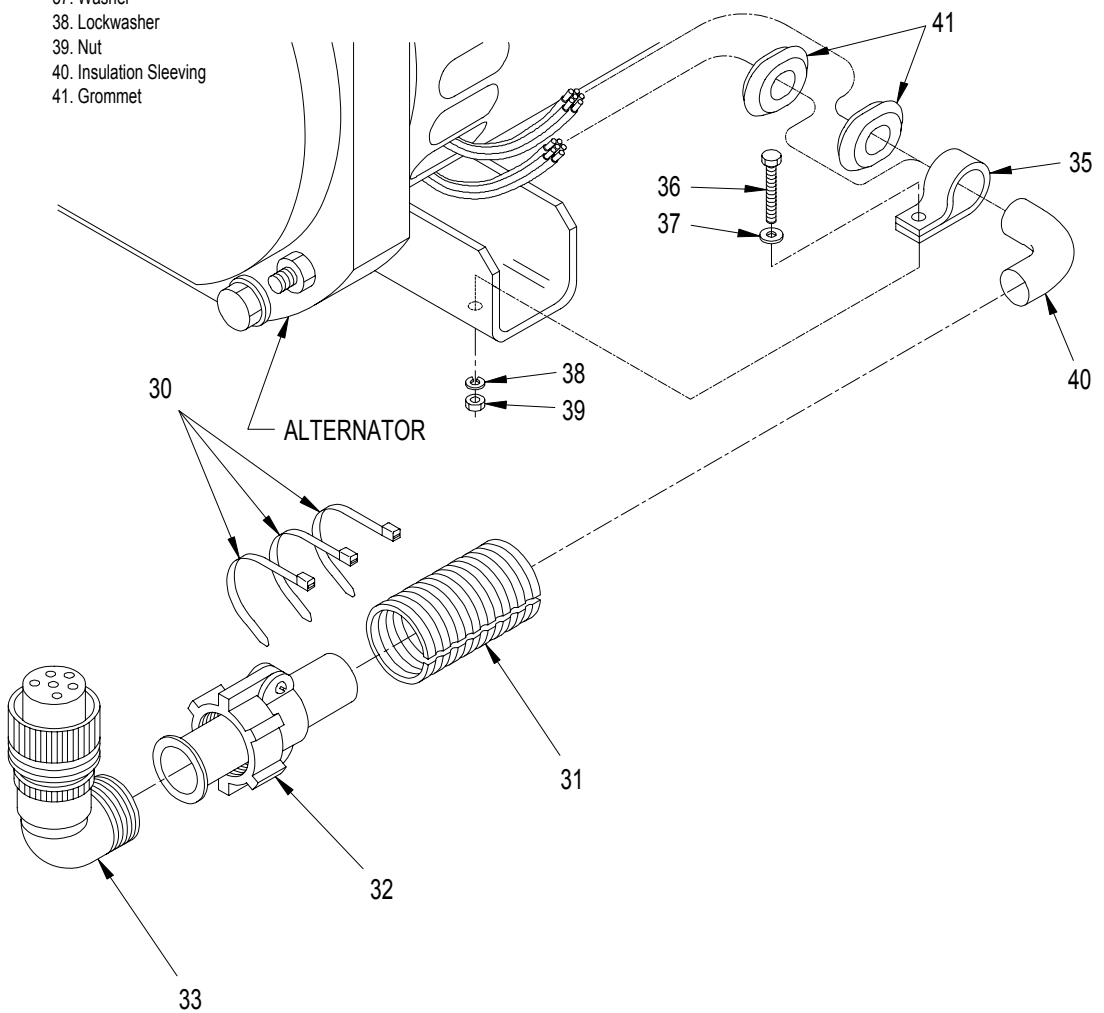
AC Alternator Assembly (MEP-531A) (Sheet 1 of 2)
